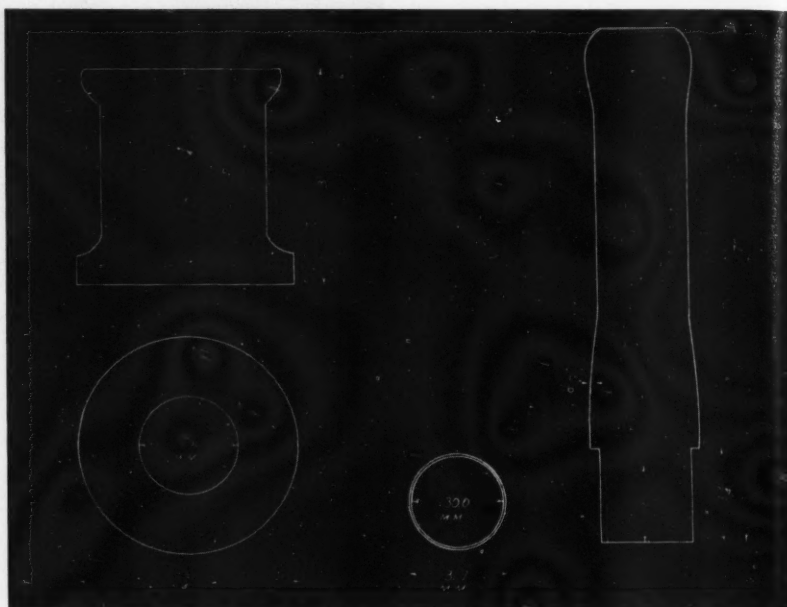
Photograph of blue print of swager. Swager is made of steel and can be turned out in any machine shop or purchased from the supply house. Mouldline fills the cups. The die is covered with tissue paper before placing in the swager. (This is a heavy instrument and makes a satisfactory swager and one that is preferable to others.)
